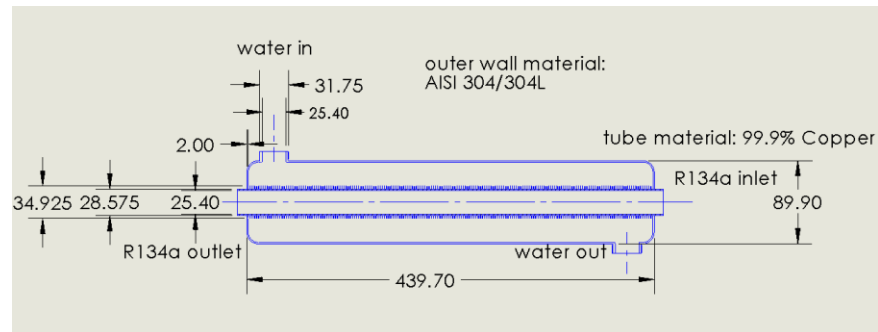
Construction drawing of the shell and tube sub cooler heat exchanger.[45]
